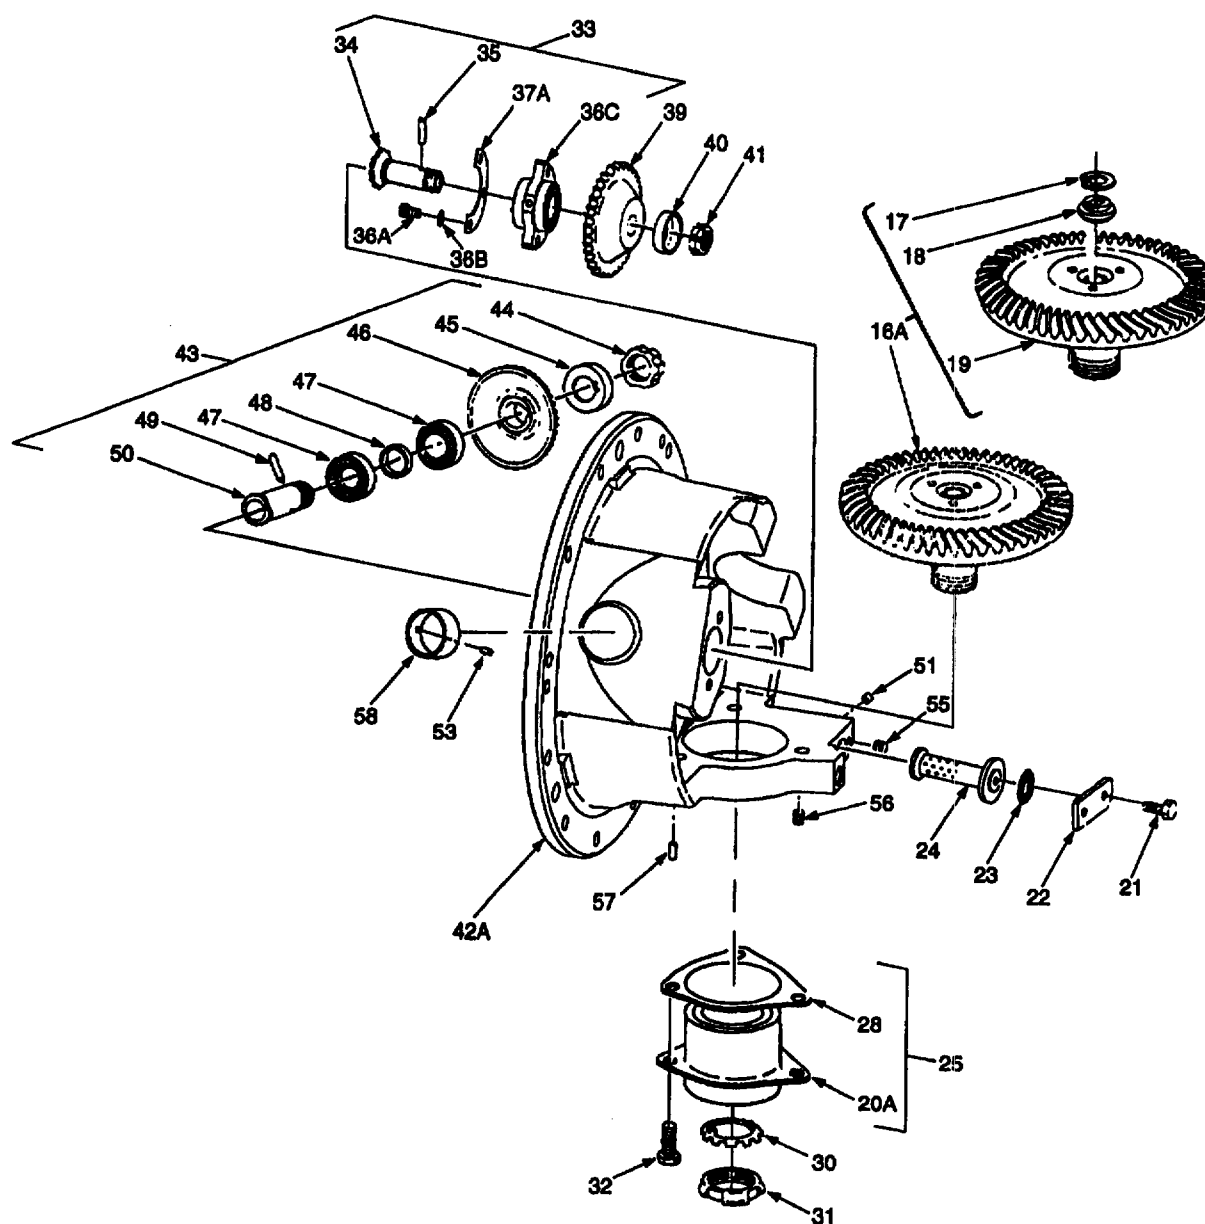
Accessory Drive Carrier Assembly (Sheet 1 of 2).
